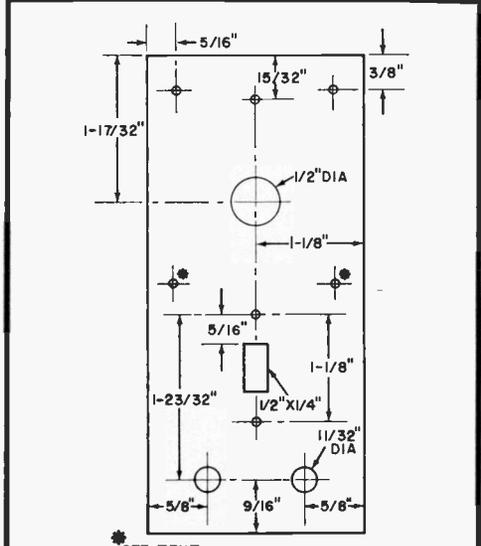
Dimension details shown in drawing are for machining front of the utility box.
